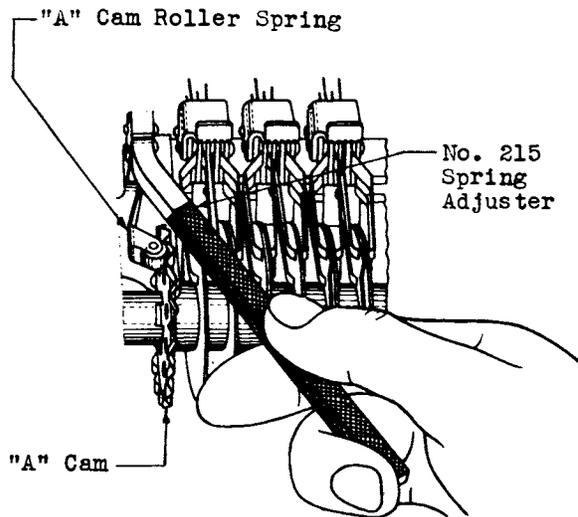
Method of Using the No. 215 "A" Cam Roller Spring Adjuster
